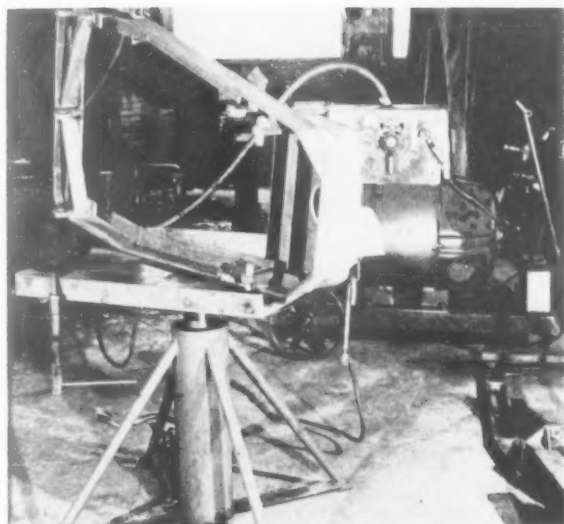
, left, is a Lyon Hydraulic Elevating Welding Table. It is handy for simpler welding operations.
